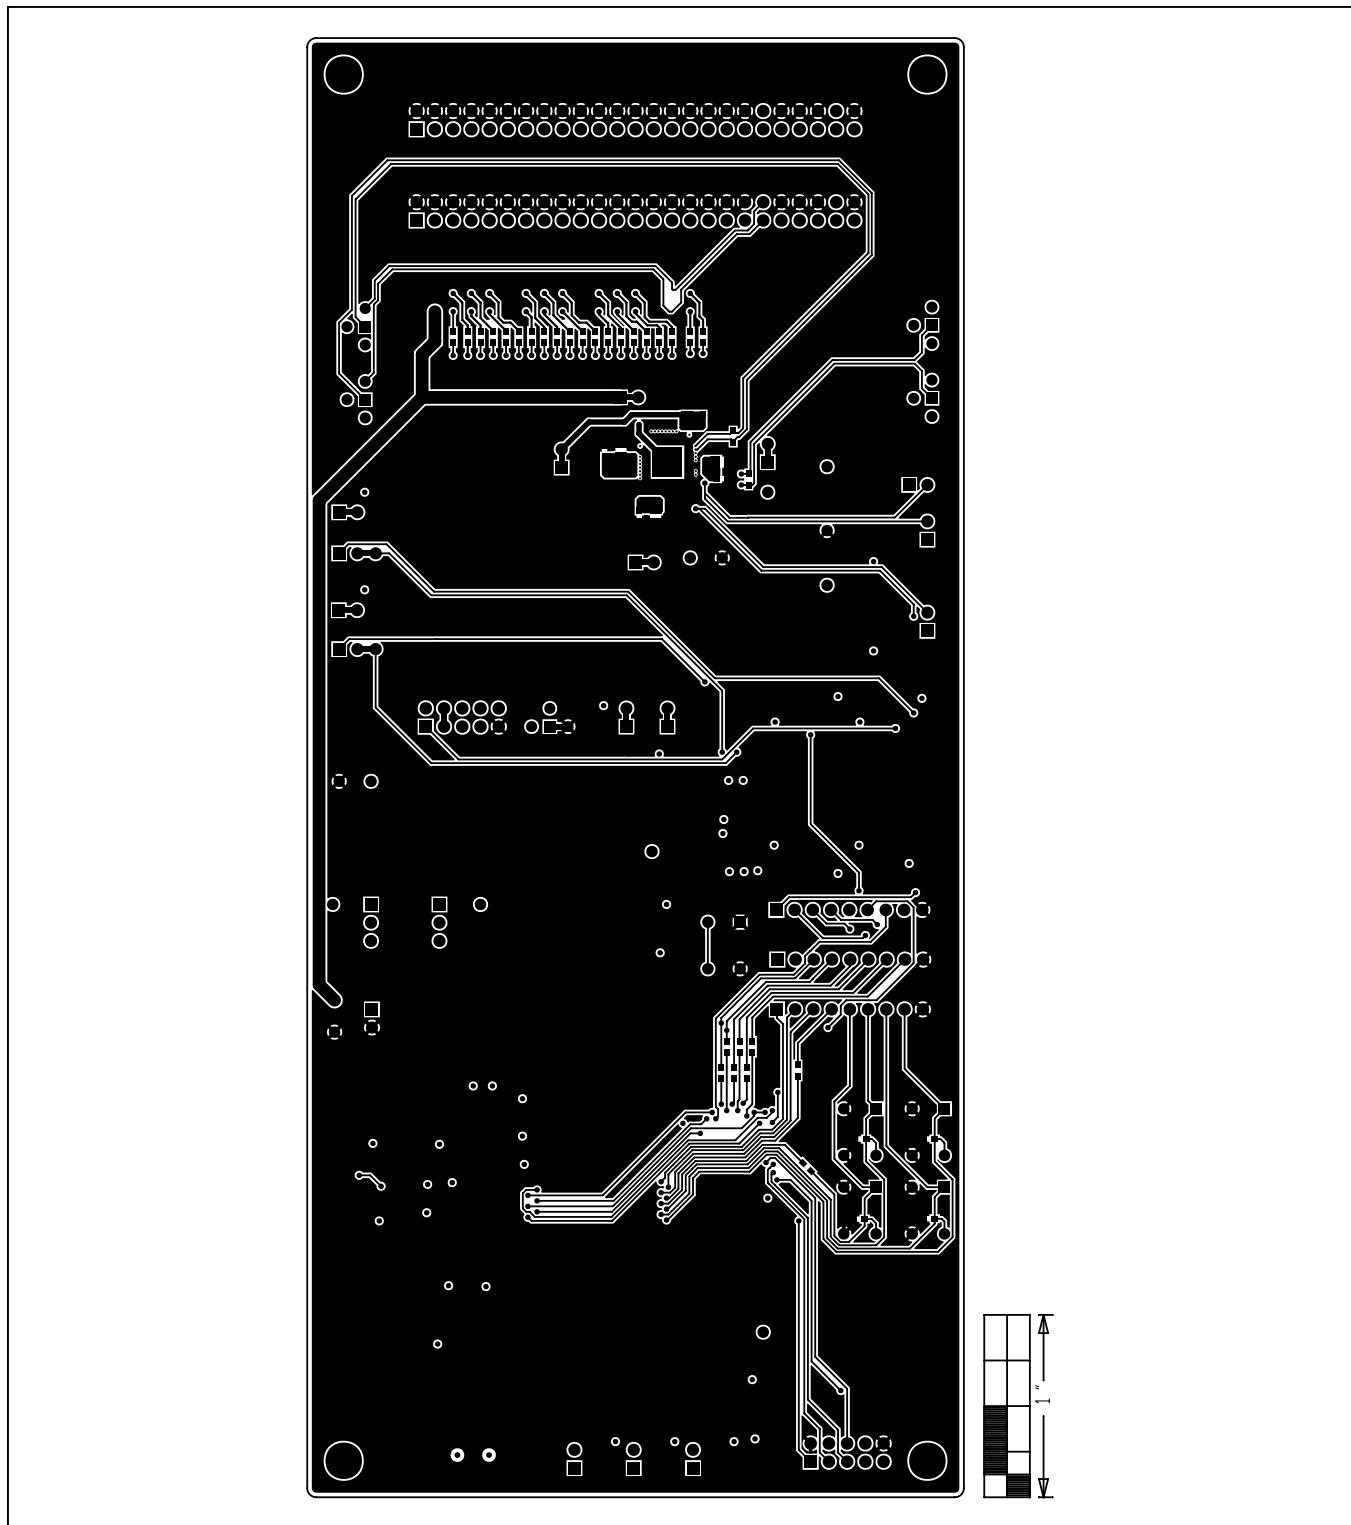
MAX11301 EV Kit PCB Layout—Solder Side
